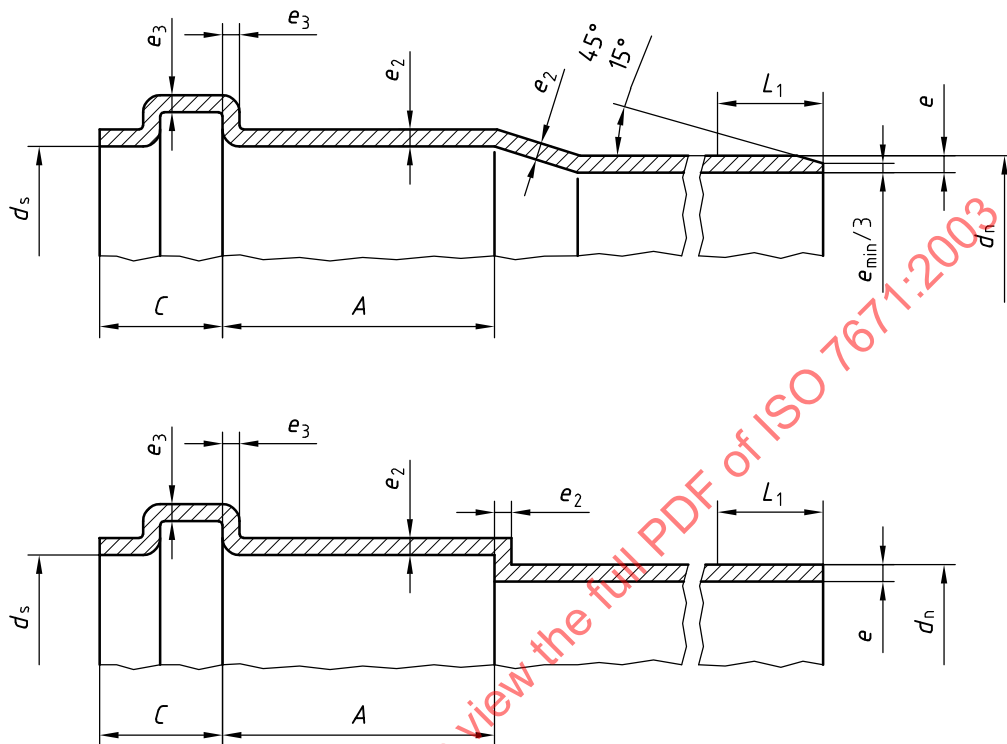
Dimensions of sockets and spigot ends for ring seal joints
